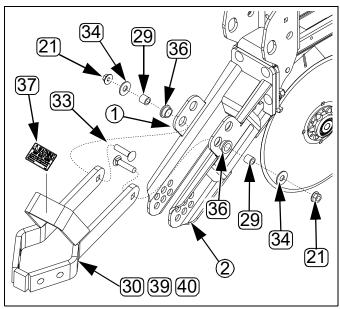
UMC-RC Arm Mounting Preferred Bushing Placement
